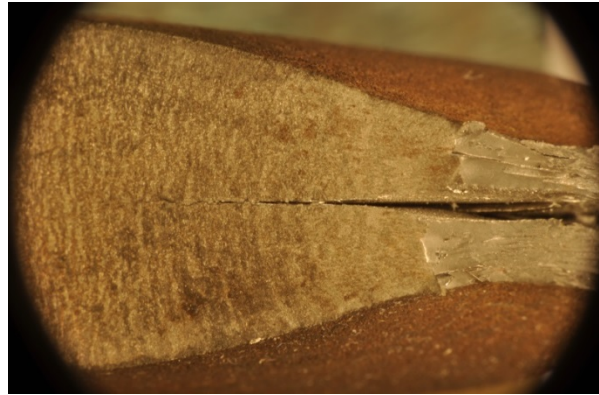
Side view of fracture surface for expanded longitudinal tensile test specimen.
